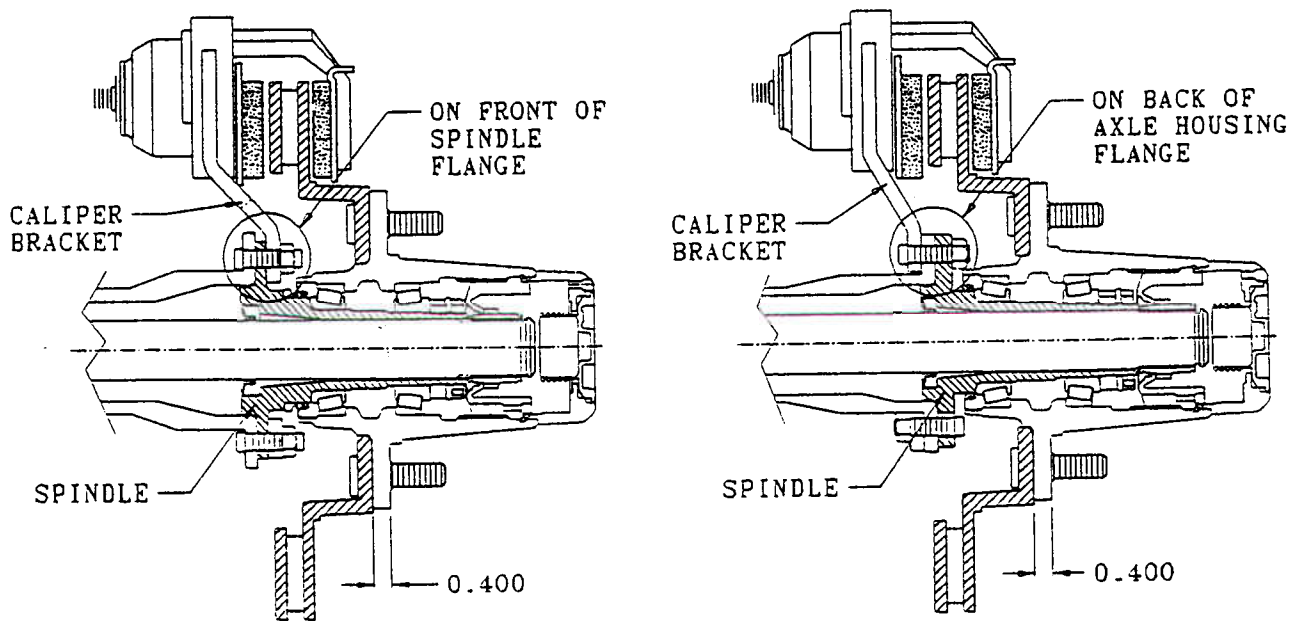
shows a typical mounting of the disc brake rotor to the inside of the wheel hub flange ( using longer studs than were used for the drum brake set-up).
